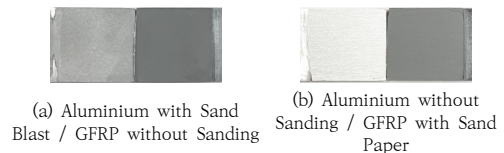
Fractured surfaces of specimens where primer is not used before bonding
